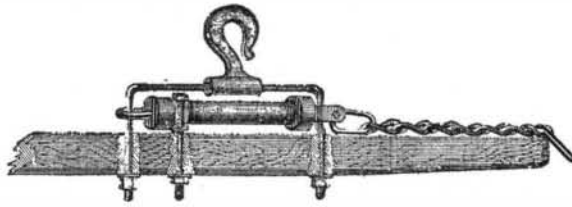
SMALLEY'S DRAUGHT TUG SPRINGS.
